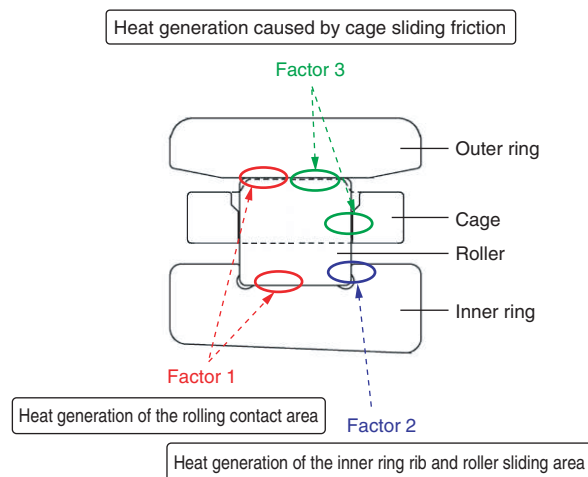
Appearance and heat generation factors of developed cylindrical roller bearing
